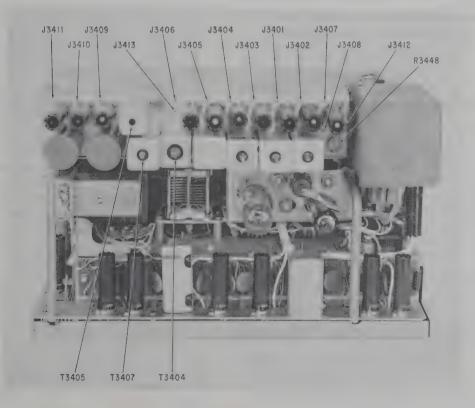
Channelizer Subassembly, Test and Alinement Points
